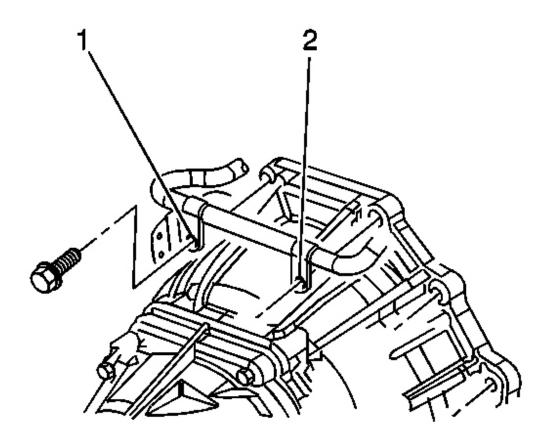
View Of Bracket Bolt & Bell Housing Courtesy of GENERAL MOTORS CORP.
